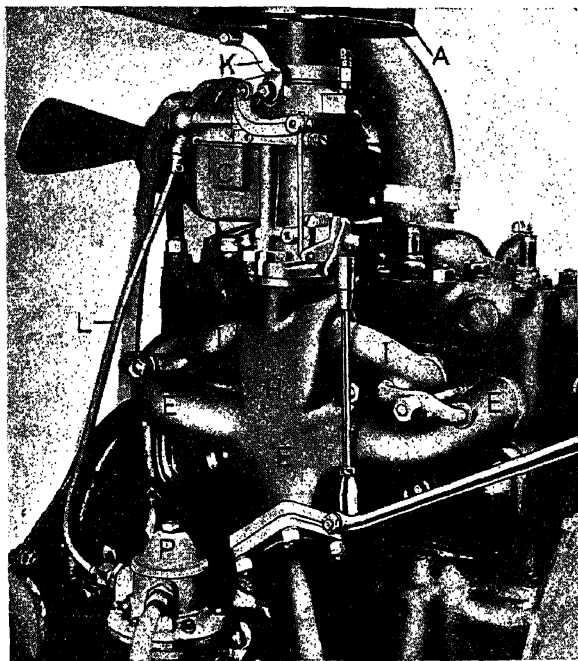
The Austin Seven Inlet and Exhaust Manifolds.
